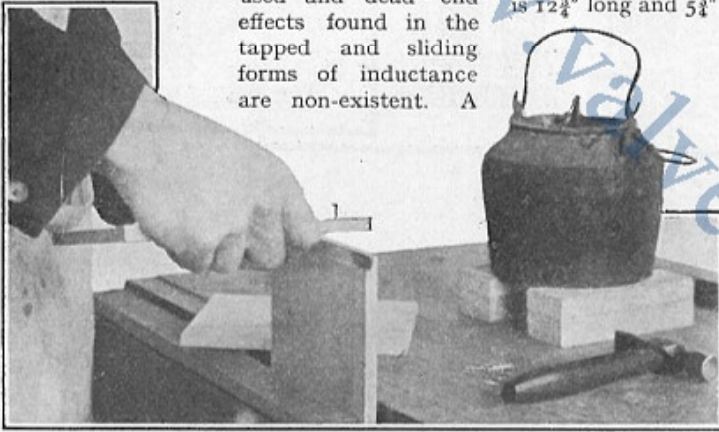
Pinning and gluing one side of the Cabinet to the bottom.
